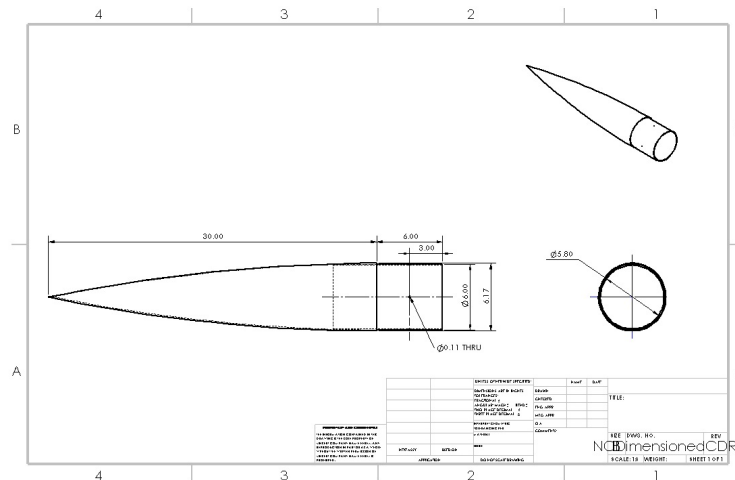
Dimensioned drawing of the nose cone with the shoulder.
